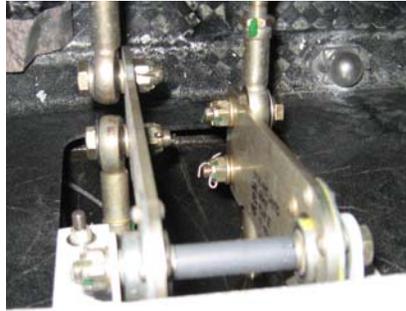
FWD stabilizer and rudder pushrod and their bearings
